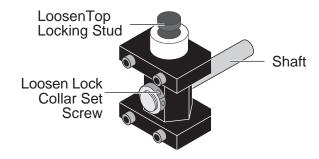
Loosening the Top Locking Stud and Removing the Lock Collar
